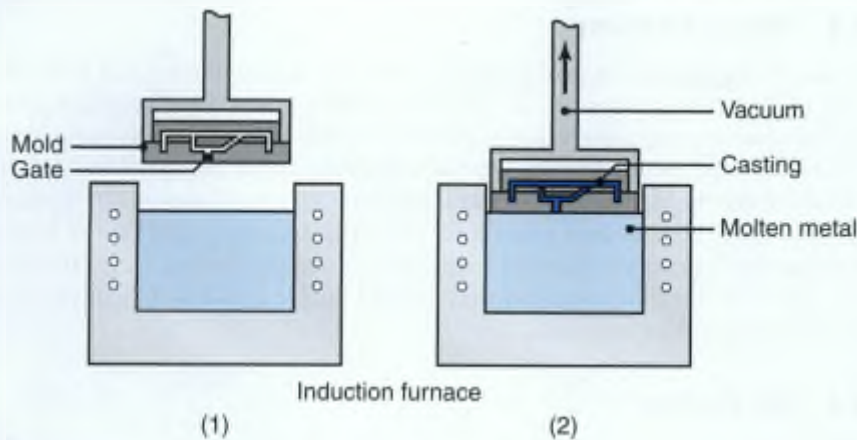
Schematic illustration of the vacuum-casting process; note that the mold has a bottom gate. (a) Before and (b) after immersion of the mold into the molten metal. *Source:* After R. Blackburn.
